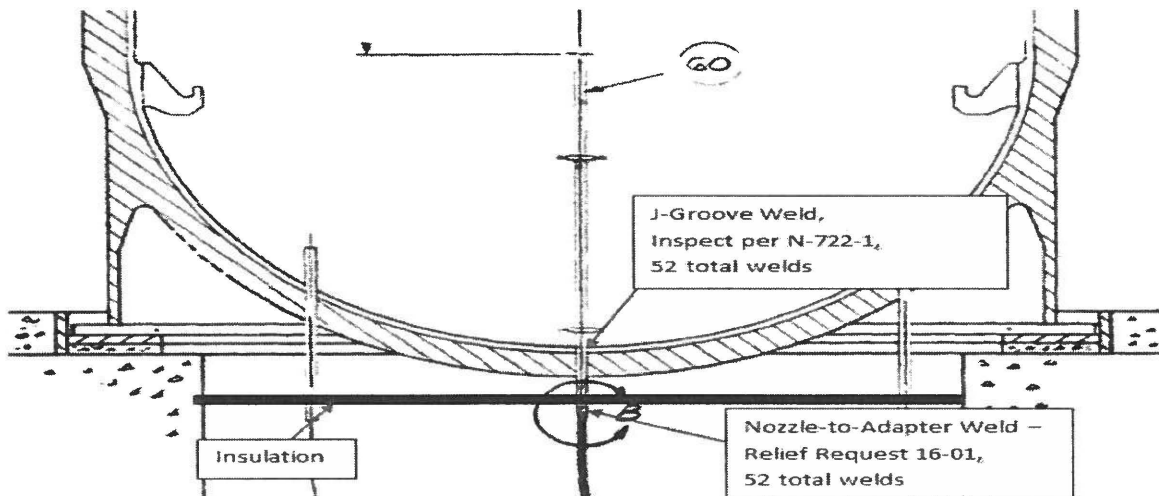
Bottom Mounted Nozzle Weld Configuration
